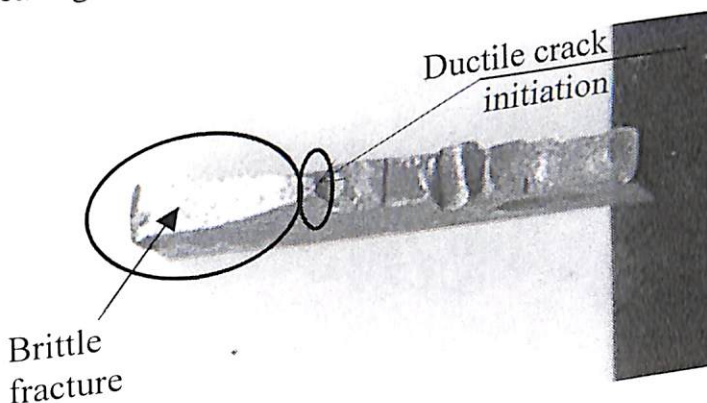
General features of fracture surfaces produced at crack initiation in EDD258.
